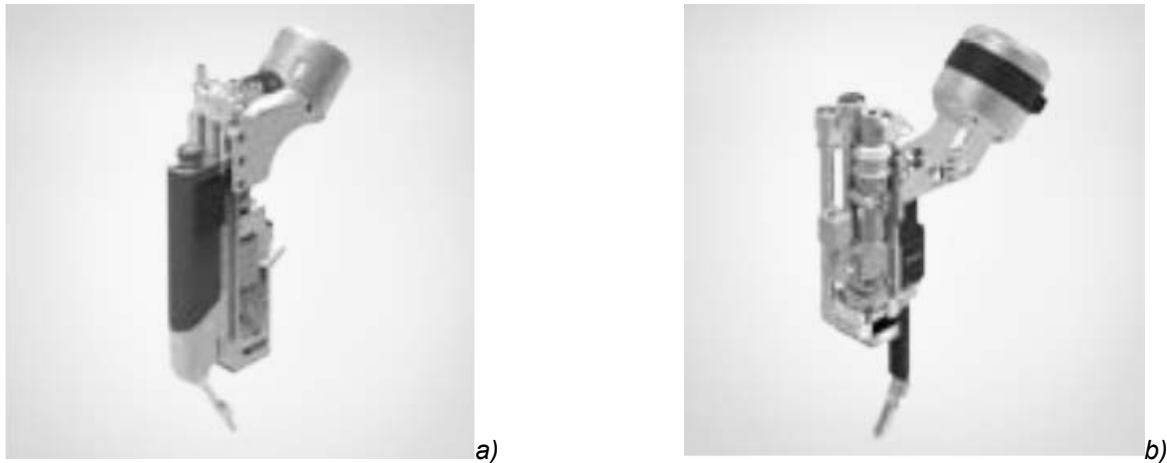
a) Compact, b) Ultracompact – integrated welding head [16, 95]
